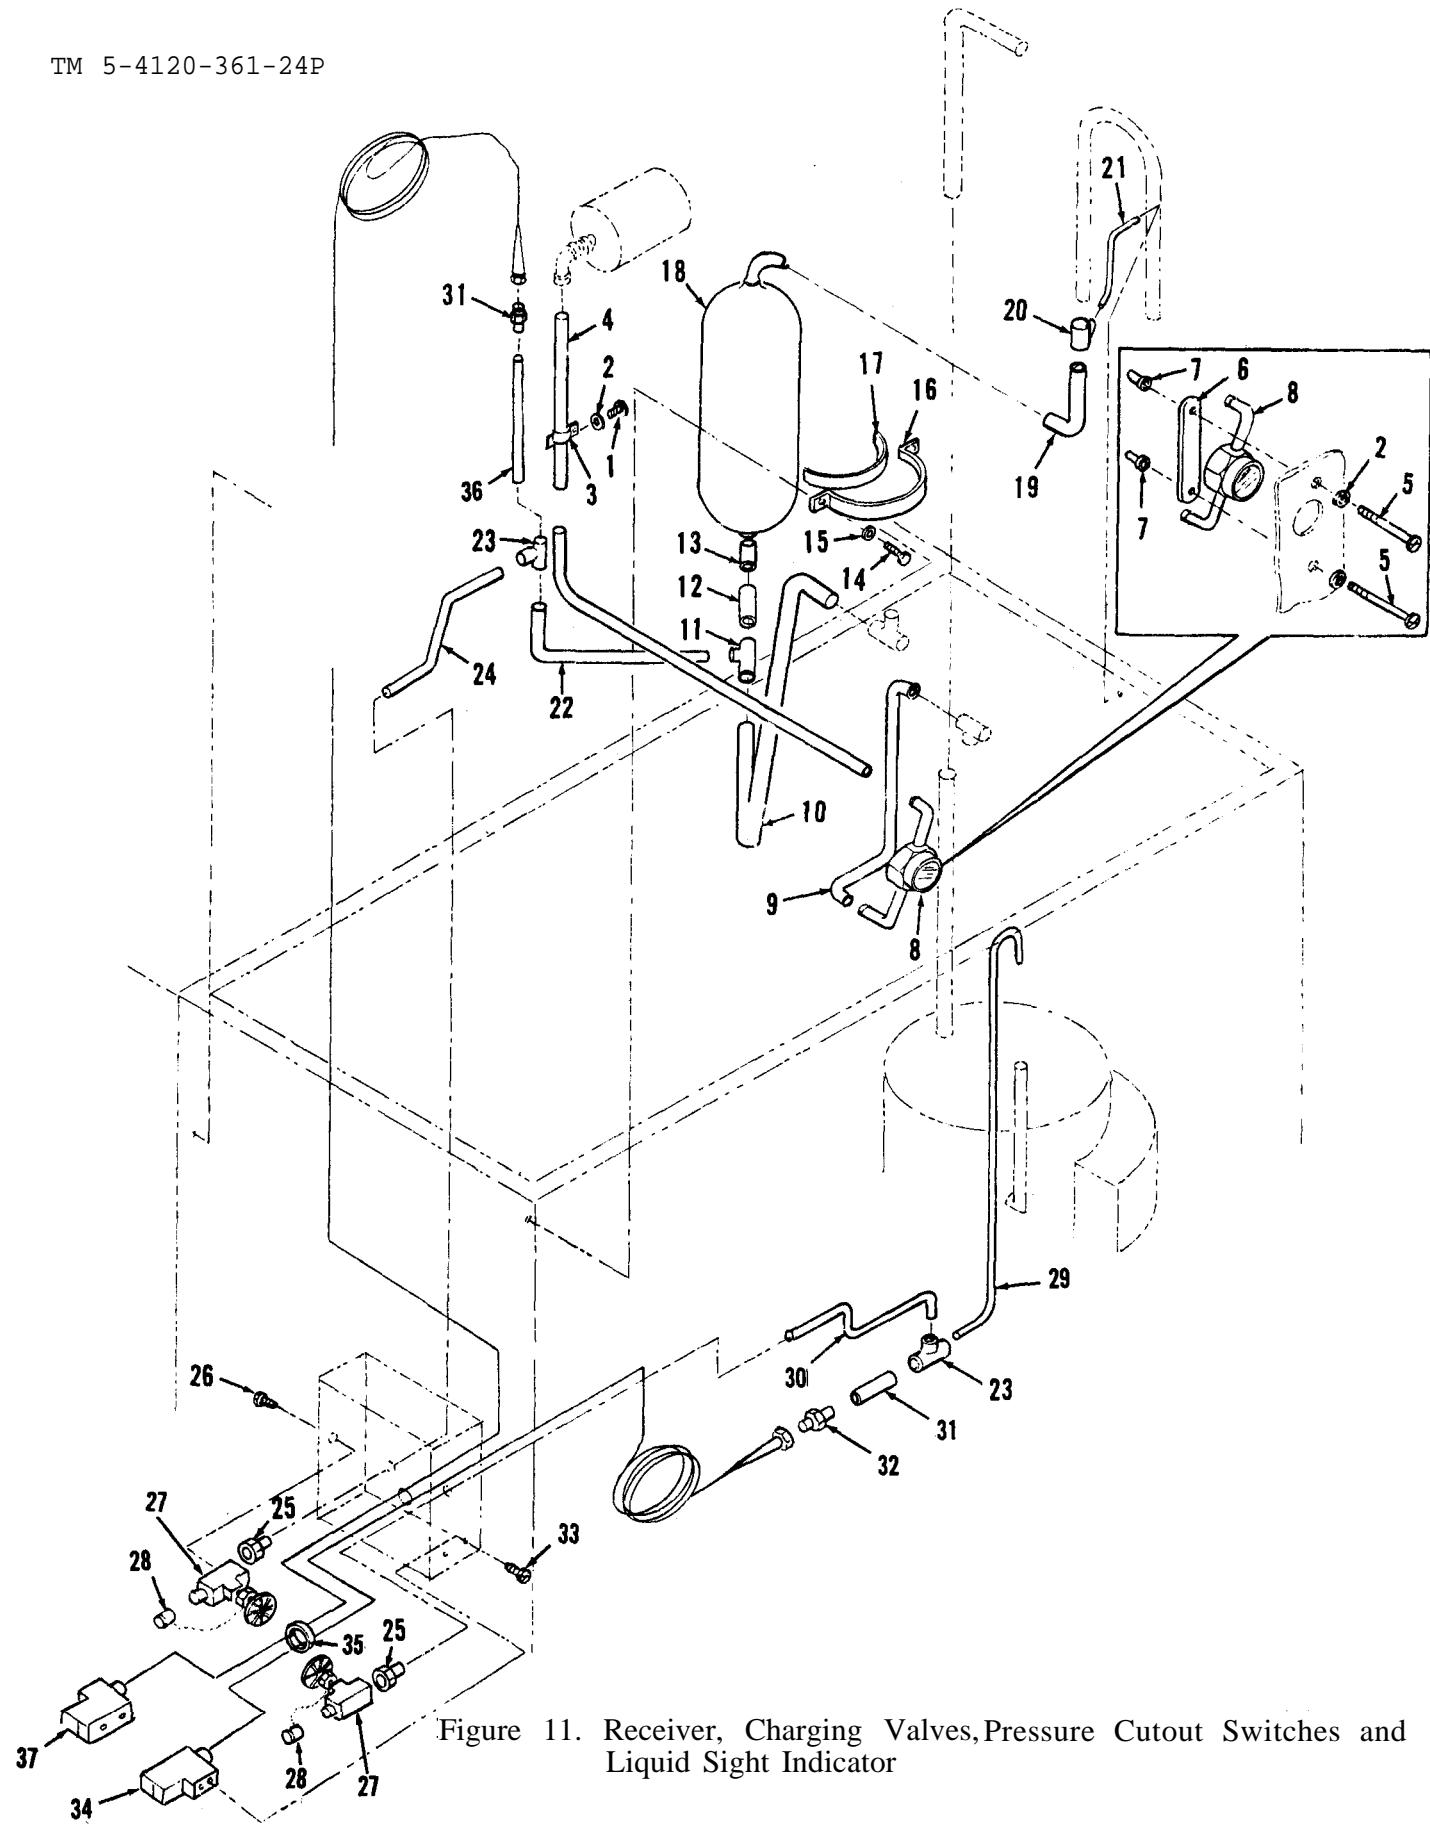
Receiver, Charging Valves, Pressure Cutout Switches and Liquid Sight Indicator
